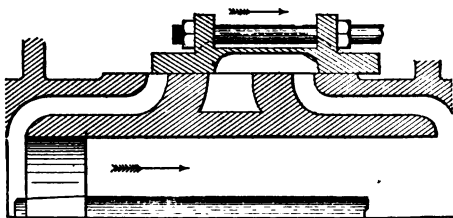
LAPPED VALVE, WITH STEAM LEAD.
